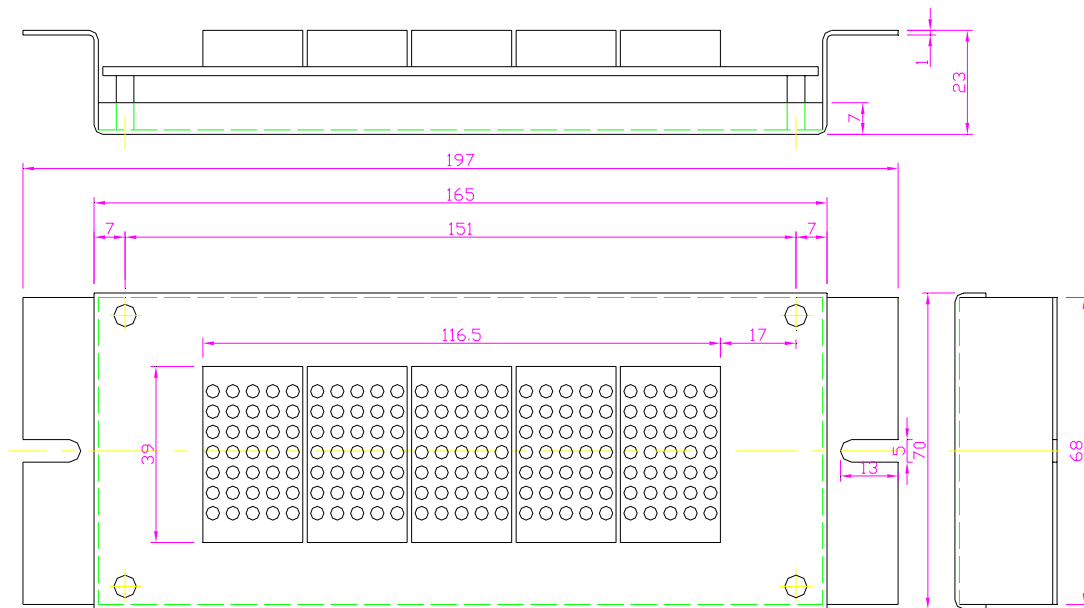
Mounting Dimensions of SM-04-HRC
